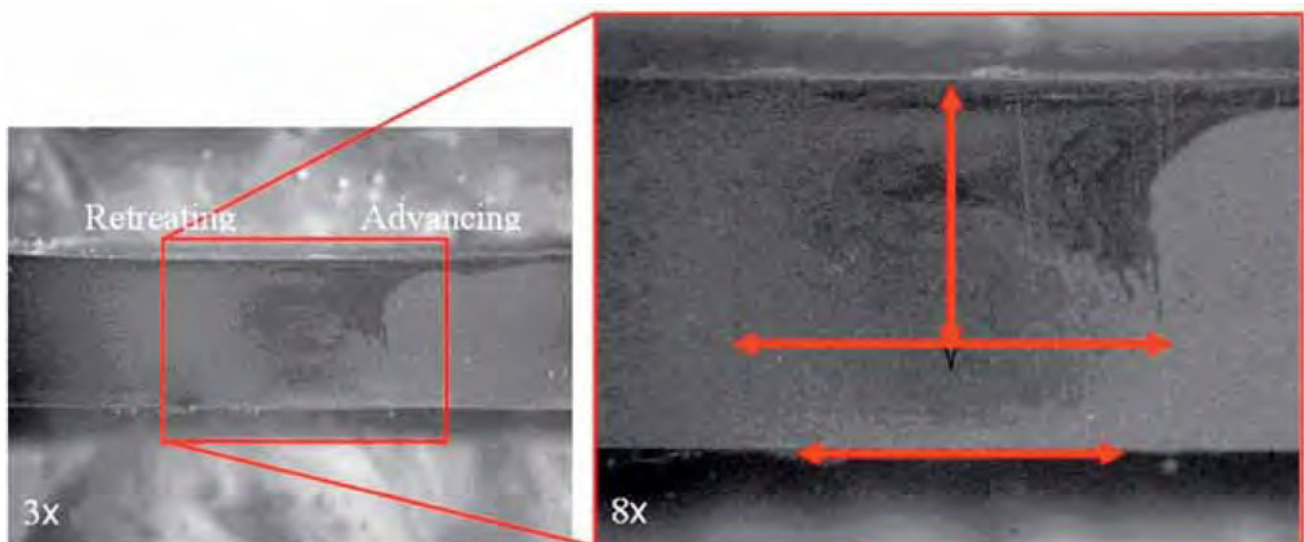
Photomicrograph of weld welded with striated flat shoulder
